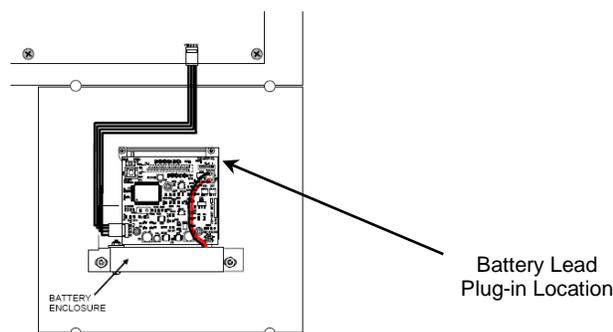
NX-EM-012 Panel Strip Printer Wiring
